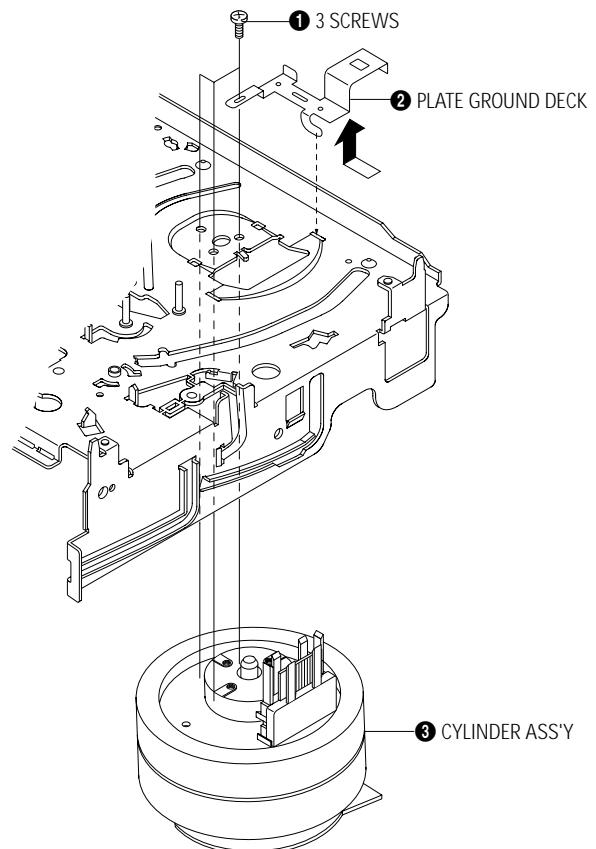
Plate Ground Deck, Cylinder Ass'y Removal
